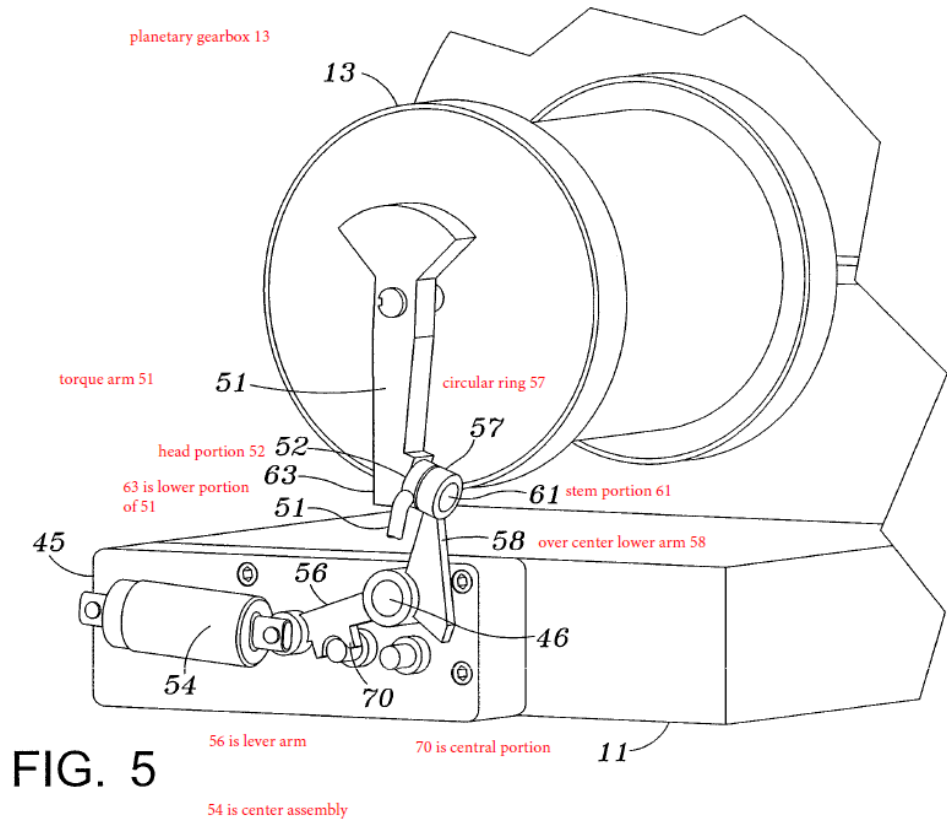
is a perspective view of a torque sensor according to an embodiment of the invention connected to the centrifuge torque sensing mechanism.
